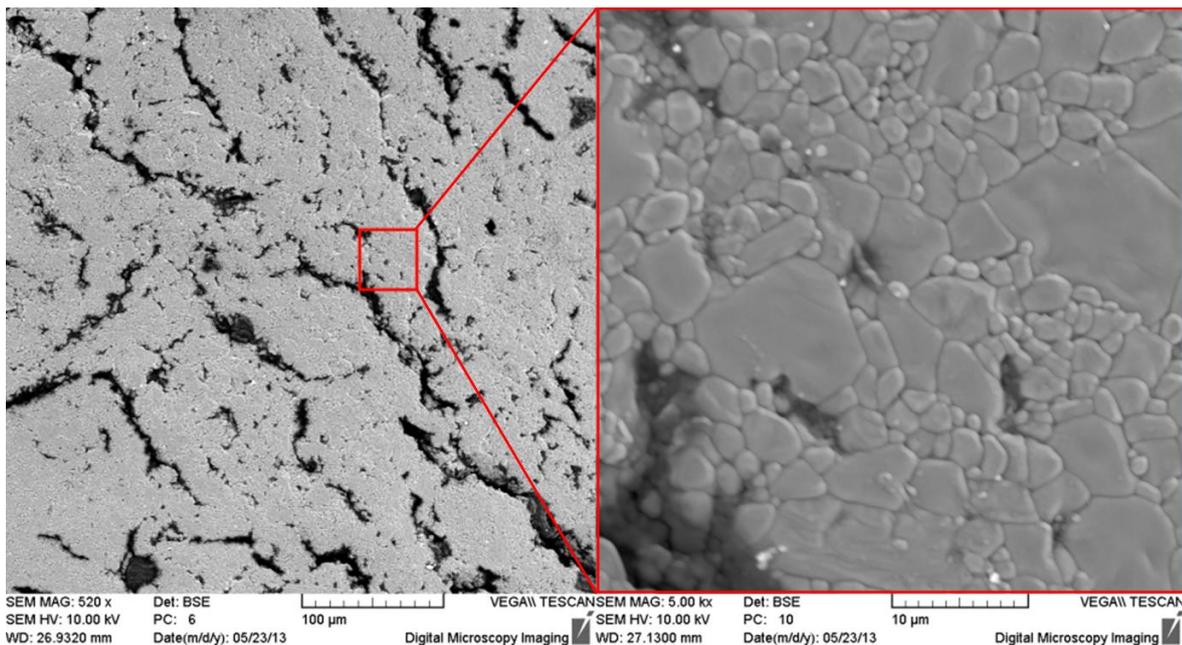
Surface defects of sintered alumina oxide PIM part
